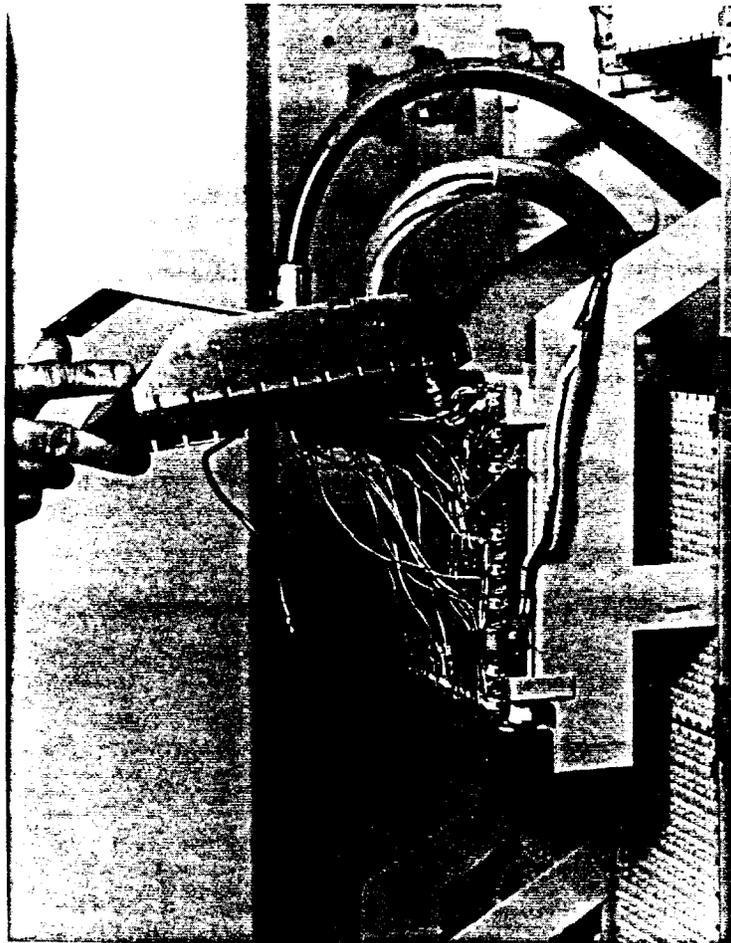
Rotate Back Top Plate — Expose Back Panel Wires
